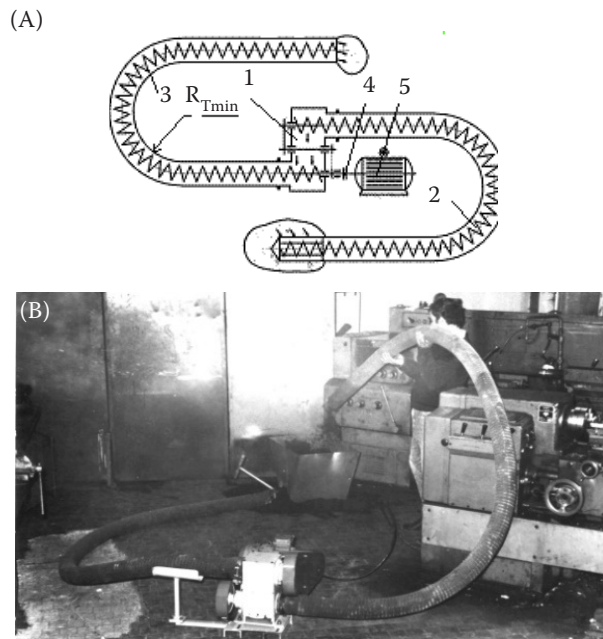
(A) The design of a flexible screw conveyor driven by an electric motor and (B) the general view of a conveyor
